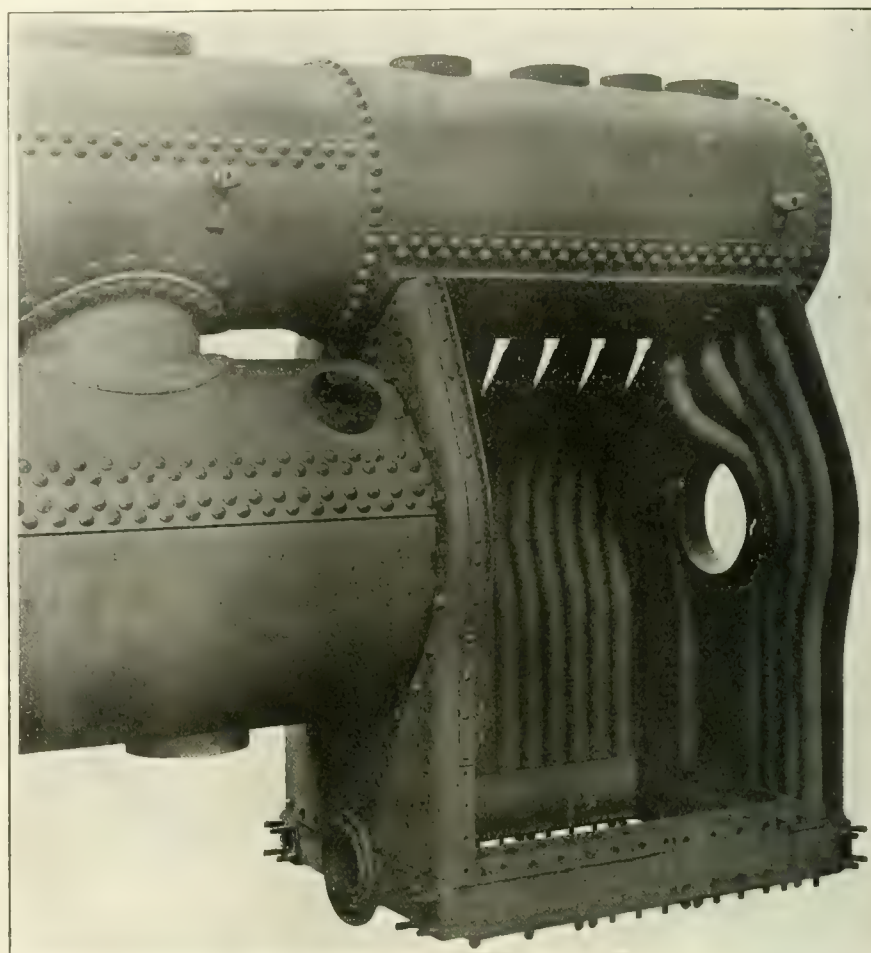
BROTRAN FIRE-BOX WITH ONE SET OF TUBES REMOVED.
